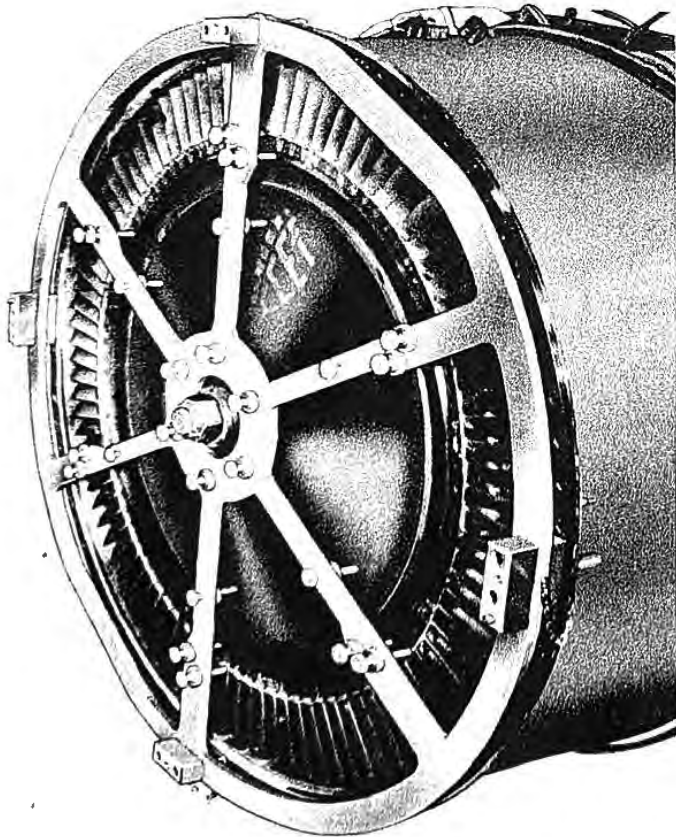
Clearance Gage Installed over Turbine Wheel
